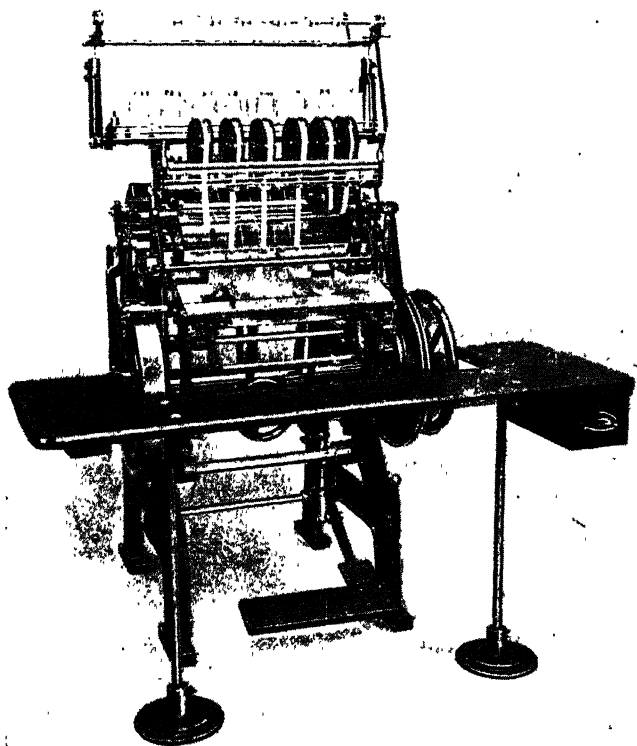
"MARTINI" BOOK-SEWING MACHINE.
